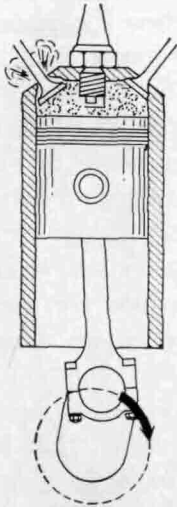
Intake stroke. The intake valve (to left) has opened, and the piston is moving downward, drawing air and gasoline vapor into the cylinder.
